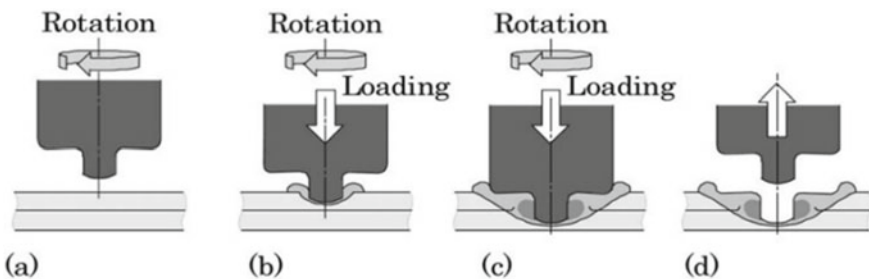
a Rotation of tool, b plunging of tool, c dwell period, d drawing out of tool [41]
